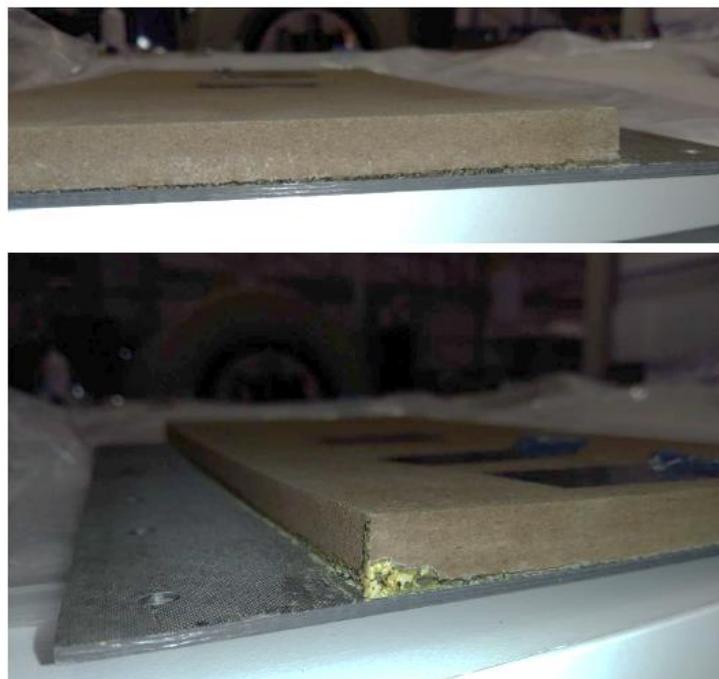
Detailed view of edge debonding on specimen 02/S21028 reported by CTA
